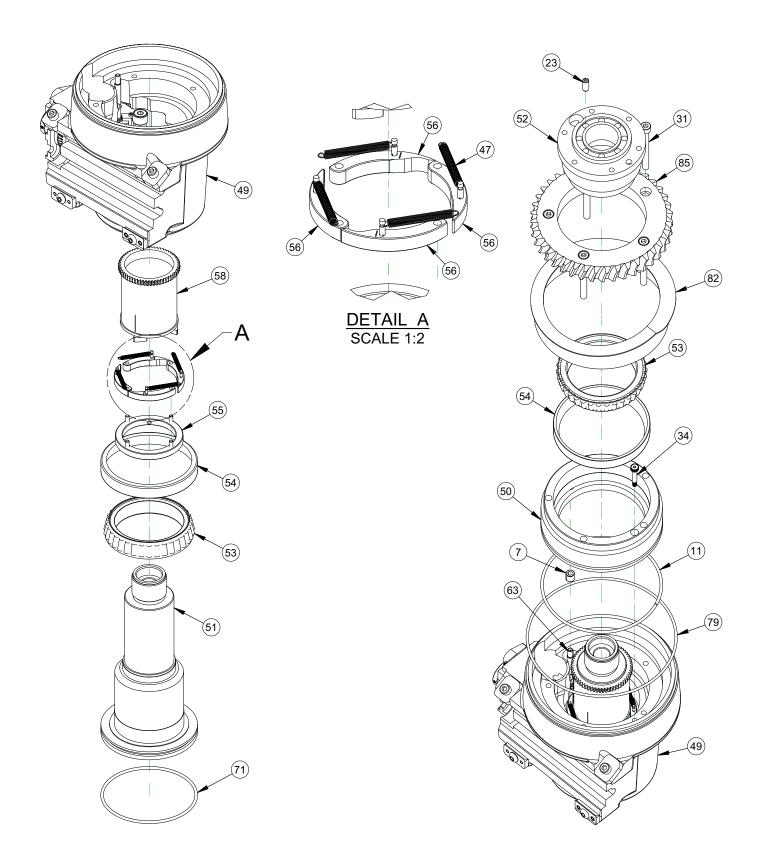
FF5300 ASSEMBLY DETAIL A (P/N 89900)
